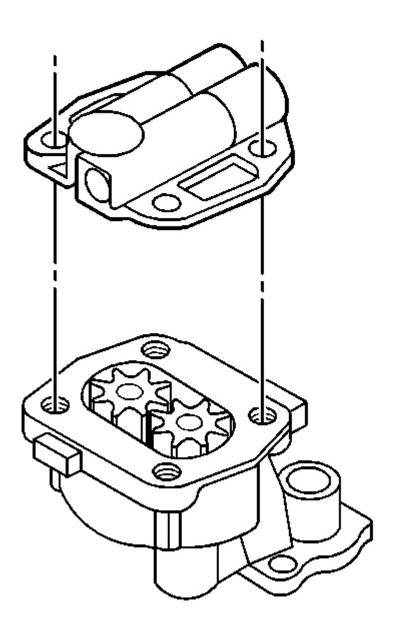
View Of Oil Pump Cover Courtesy of GENERAL MOTORS CORP.
